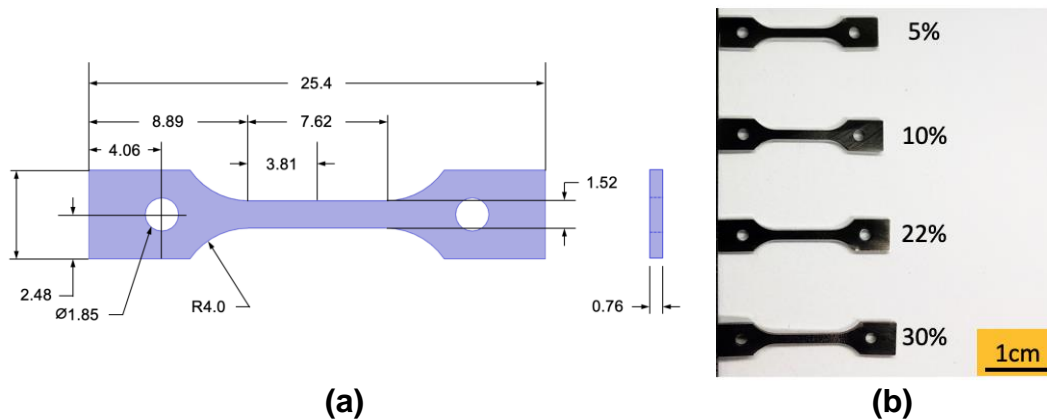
(a) A schematic shows the geometry of the miniature tensile sample used in this work, the dimensions are in mm. (b) The optical photo of the progressively deformed samples.
